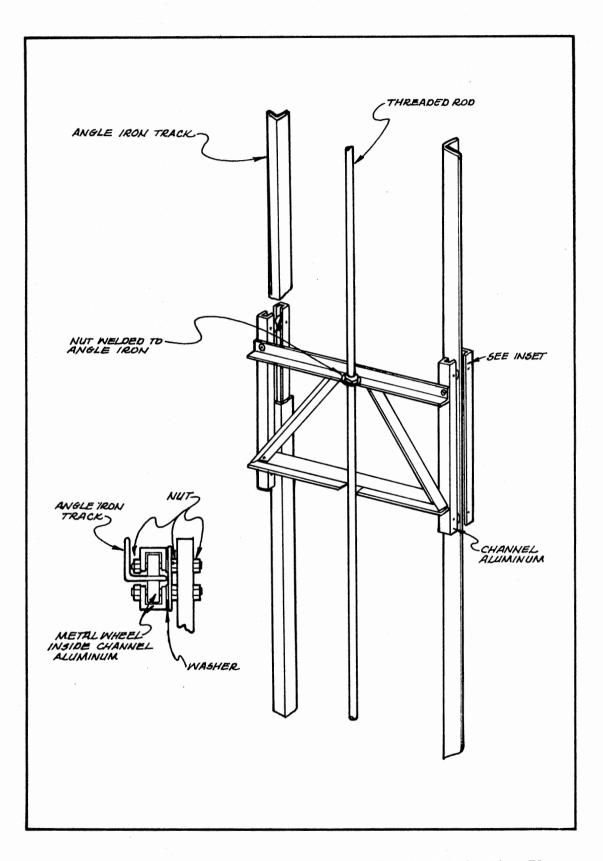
Tracking Columns for Animation Stand, Fabrication Plans
